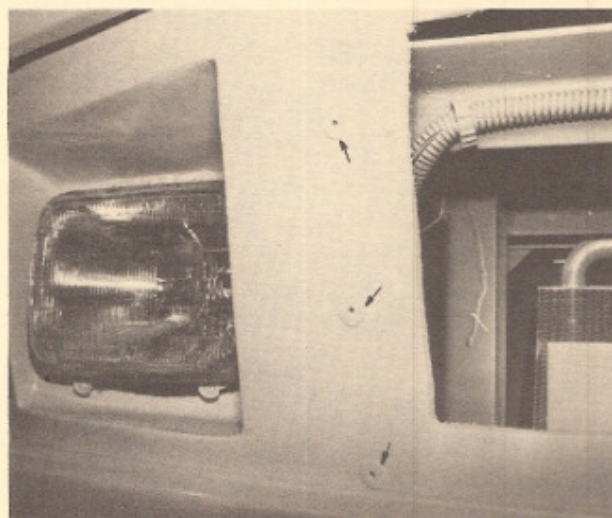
Grille Removal: Remove 13 No. 6 pan head Phillips, black-painted heads. Screw locations include 3 at each end, 3 at the center, and 4 across the top.
